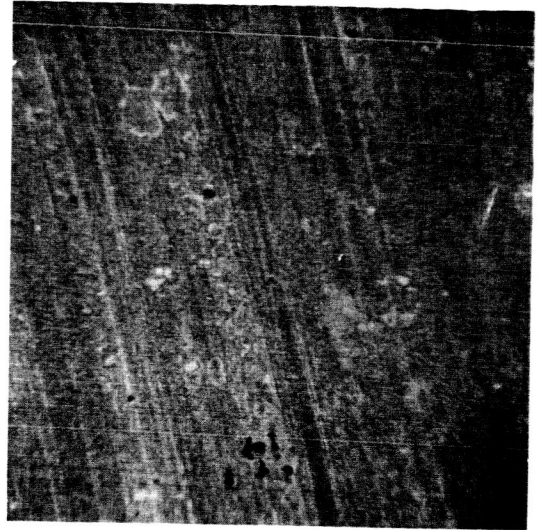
Ball Bearing Race Groove of New Bearing Before Test
